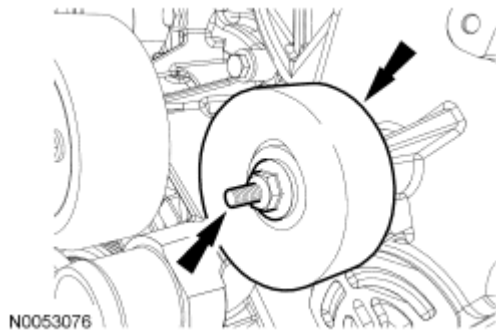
Locating Stud Bolt & Accessory Drive Belt Idler Pulley
